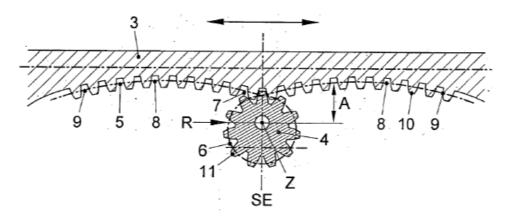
illustrates a rack and pinion gearing having a pinion (4) which is eccentrically mounted.
